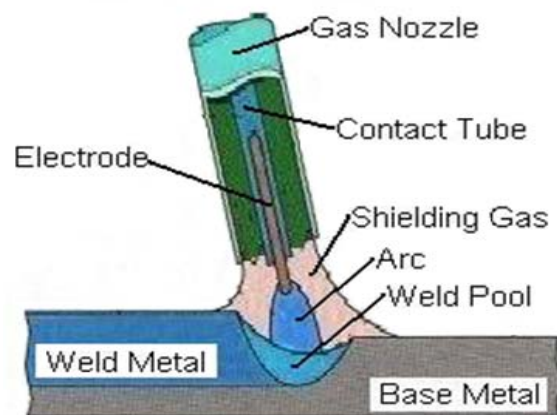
Gas Metal Arc Welding Process [1]
